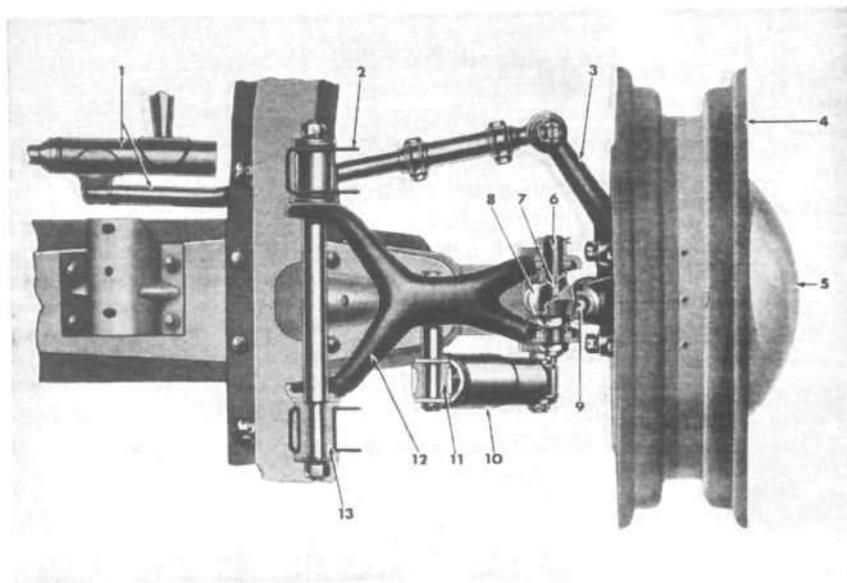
FRONT STEERING KNUCKLE (With Spicer Universal Joints)
